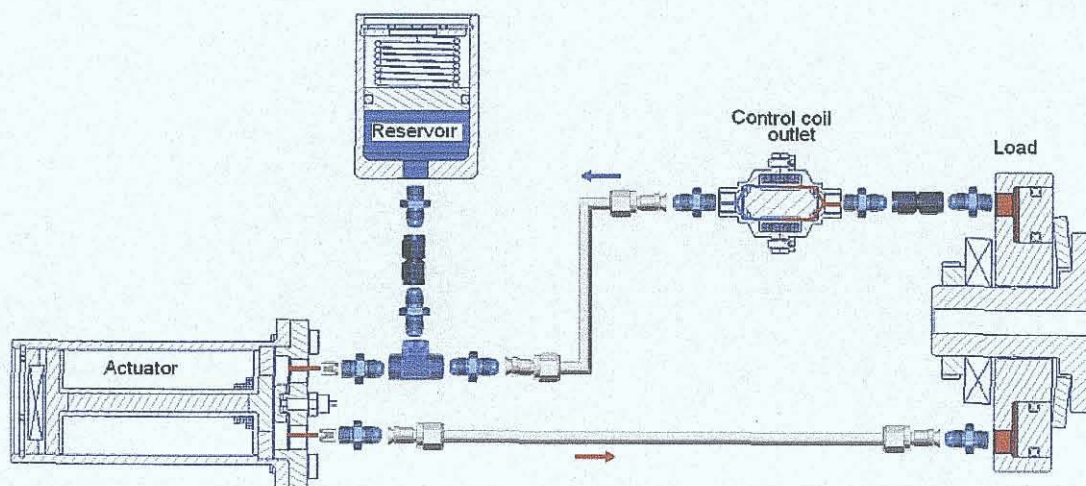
Cross section of "MS" pump actuator with "MR" release valve
